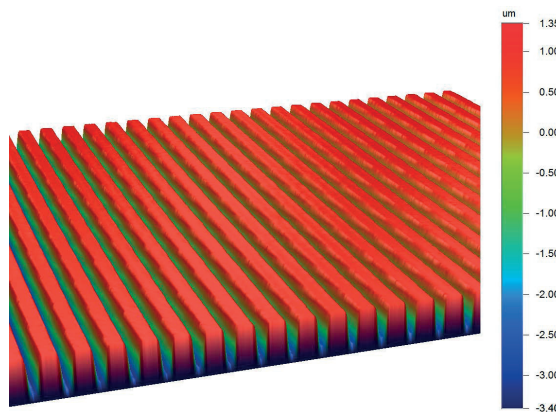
Optical profiler measurement performed on a B type coil after the seed layer deposition.
